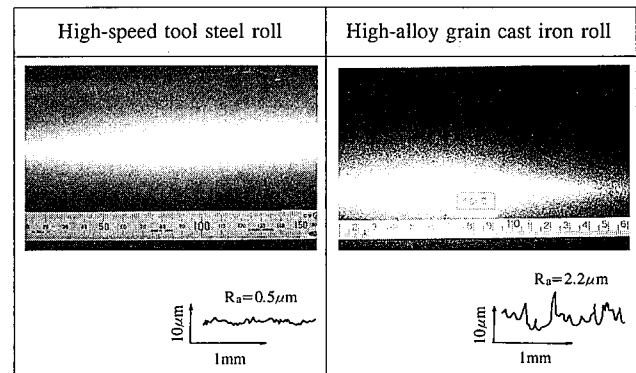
Surface texture of roll after use in finish rolling at hot strip mill
